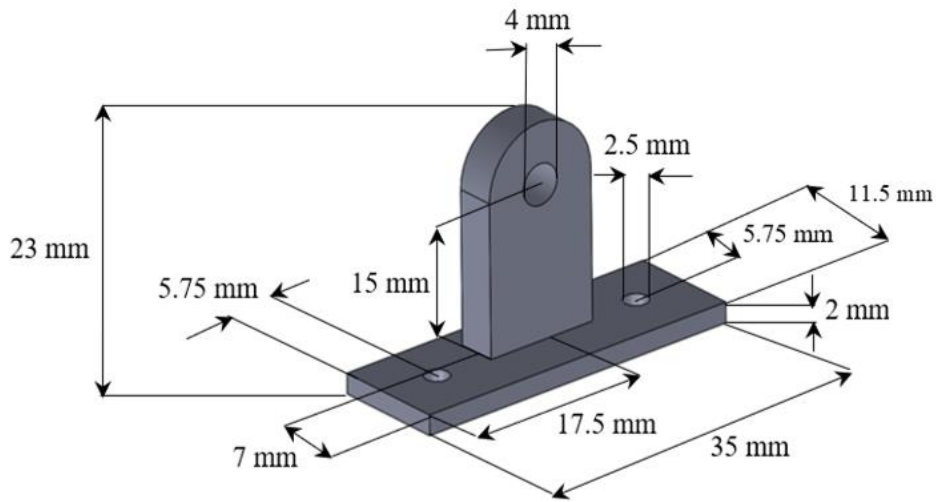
CAD model of the designed bracket, with the part dimensions specified.
